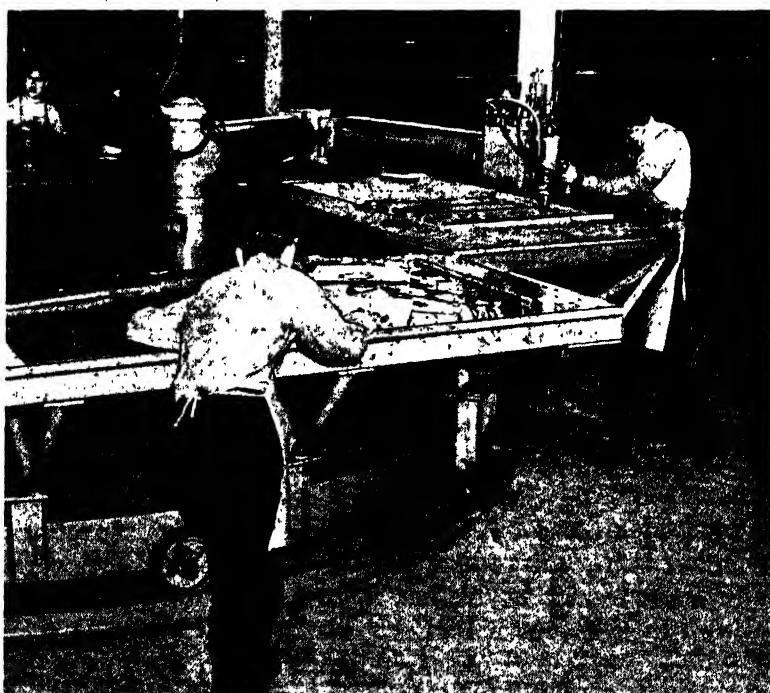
This Machine has a Large Rotary Table with Four Loading Sections for Routing Sheet-metal Blanks
